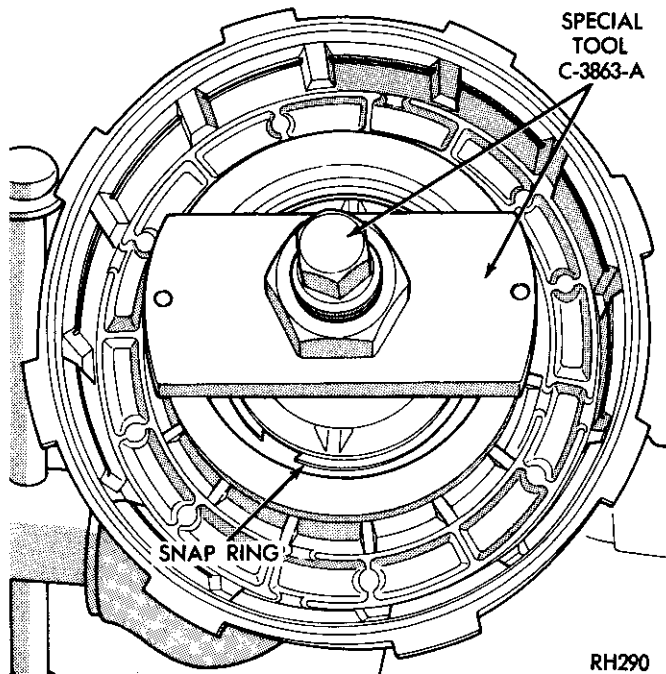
Removing Front Clutch Spring Retainer Snap Ring—727
